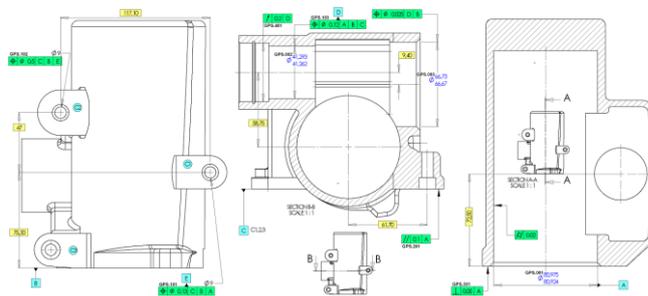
Drawing of the workpiece used for the experimental analysis of industrial CMMs (dimensional and geometrical tolerances under scrutiny labeled as GPS.XXX)
